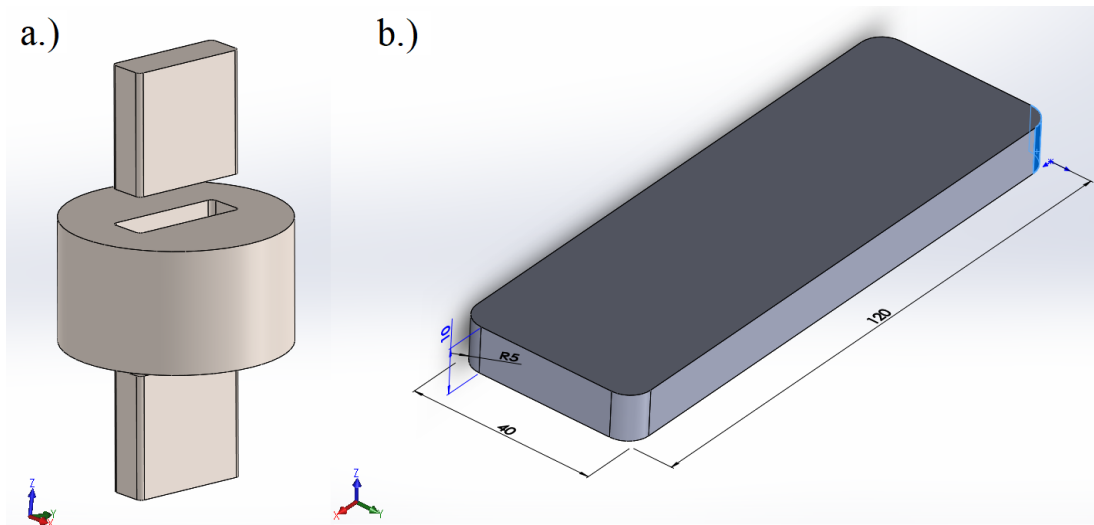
a.) 3D design of squeeze casting mold punch assembly b.) Three-point flexural sample
